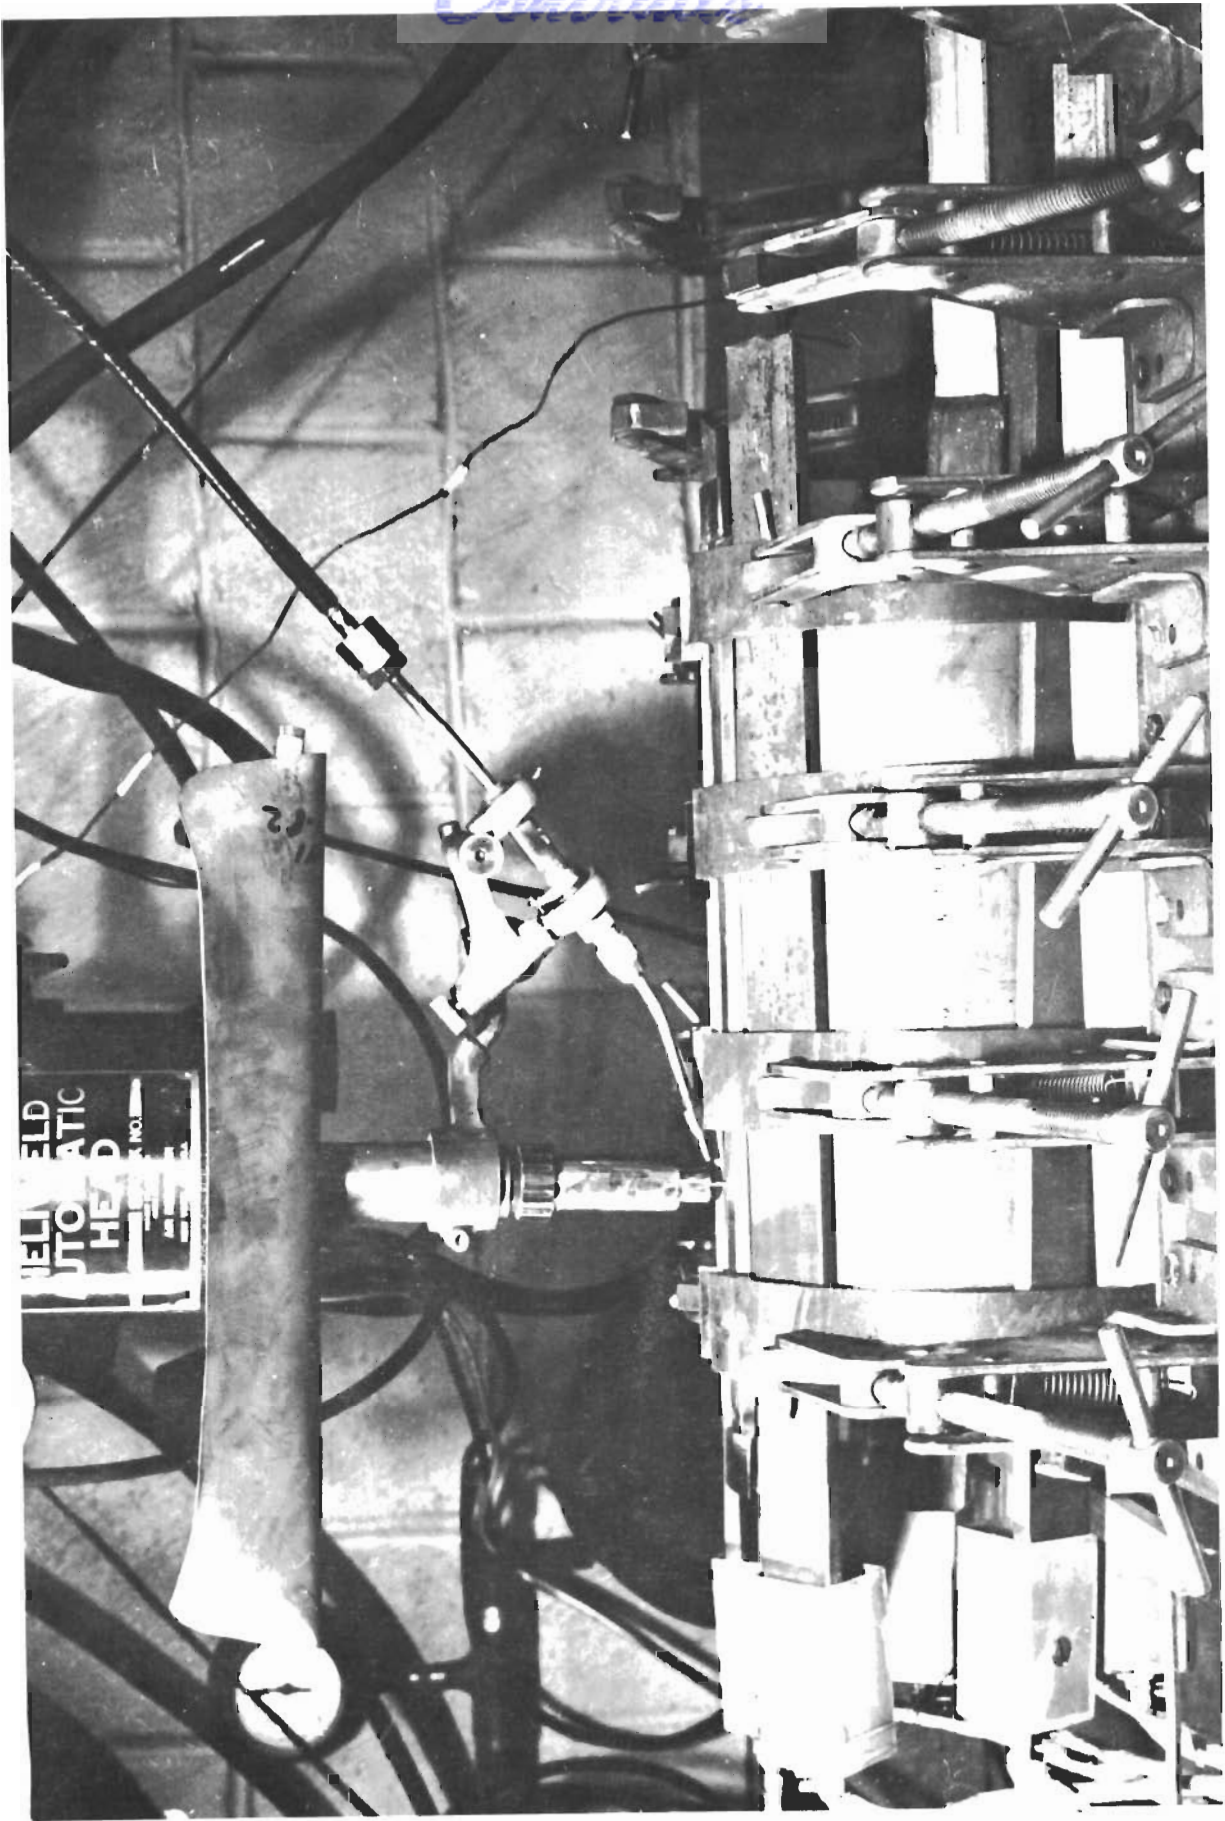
WELDING LONGITUDINAL SEAM OF PRESSURE VESSEL WITH THE
